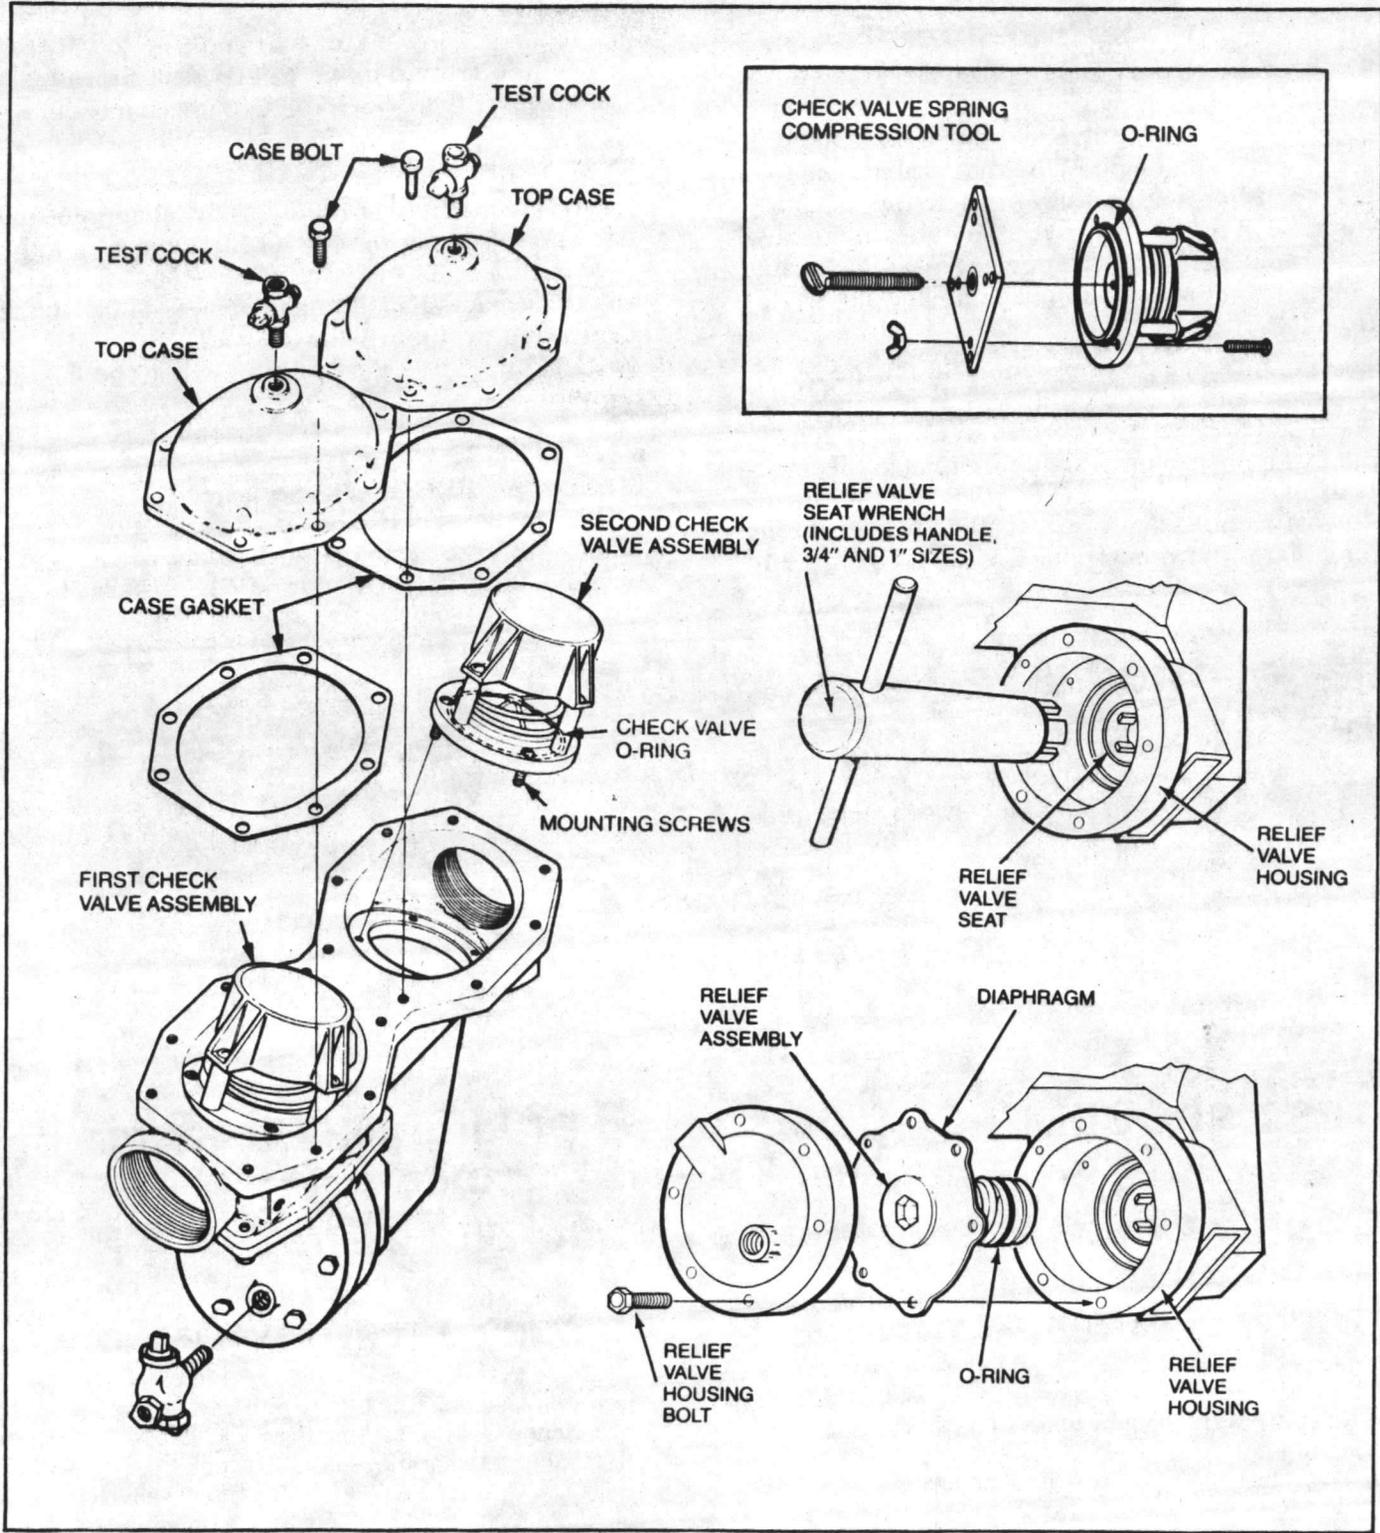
1 1/4", 1 1/2" AND 2" FRP II REPLACEMENT PARTS
